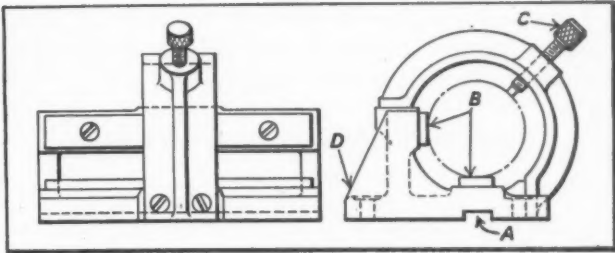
Optical Bracket for Mounting Equipment on Jigs
